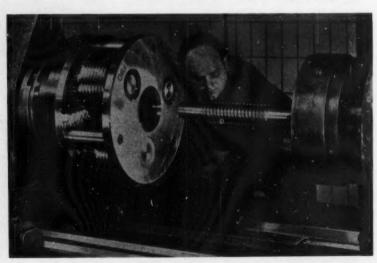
A special head developed for rolling a 2-start Acme thread on a large-diameter spindle
